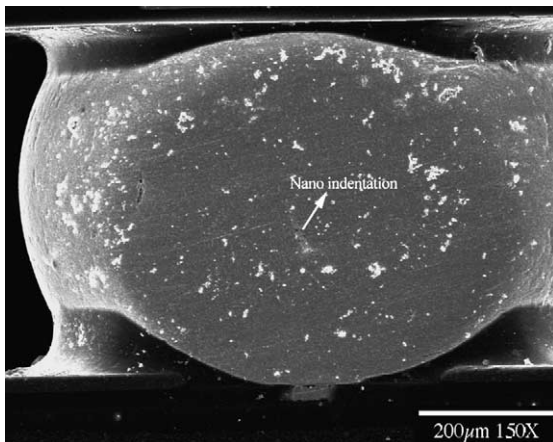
Solder joints in BGA module after 1500 thermal cycles.
